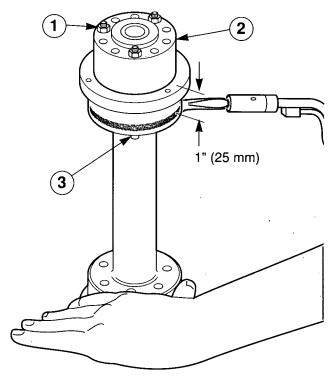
Installing bearing block. (1) Nut, (2) Bearing Block, (3) Installation Pin.
